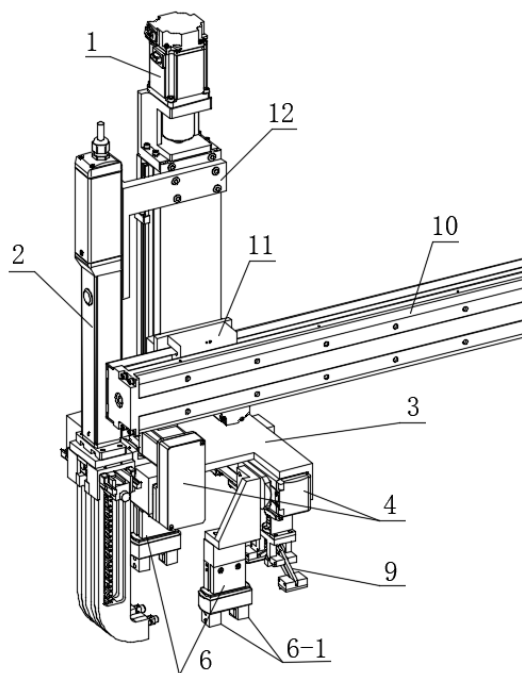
Rear view of the pickup and transfer device for the inner packet of special-shaped multi-specification cigarettes
